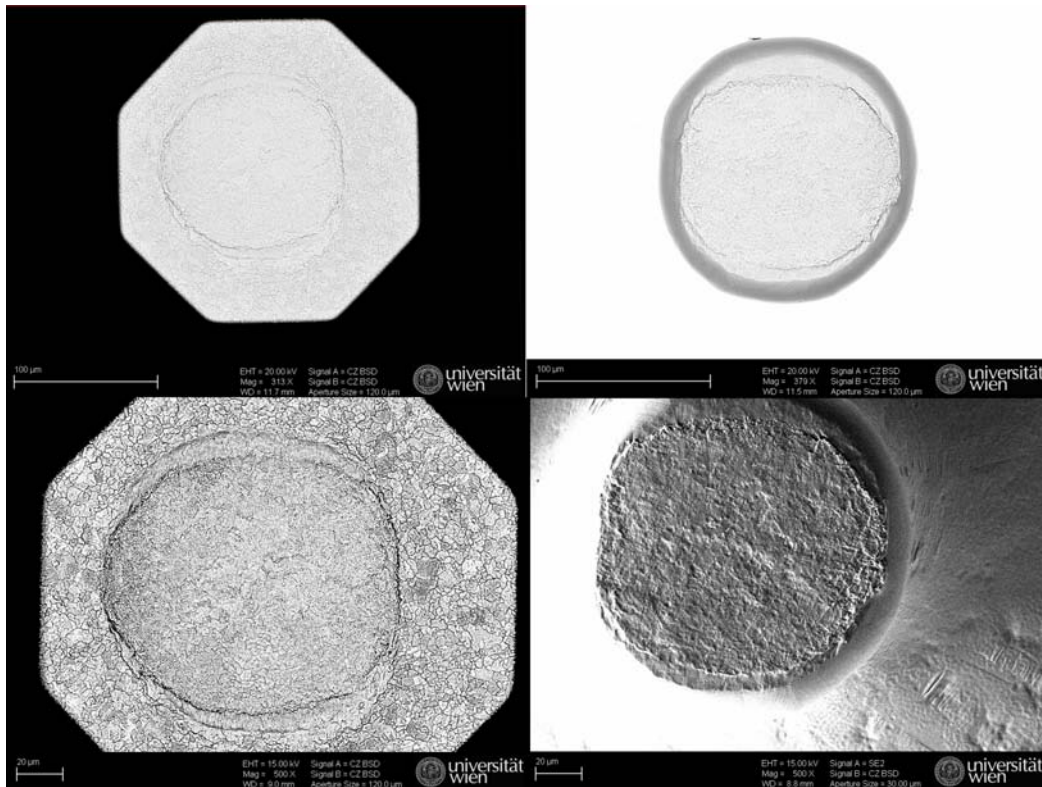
Fatigue fractographs of Cu-Cu bond interfaces
